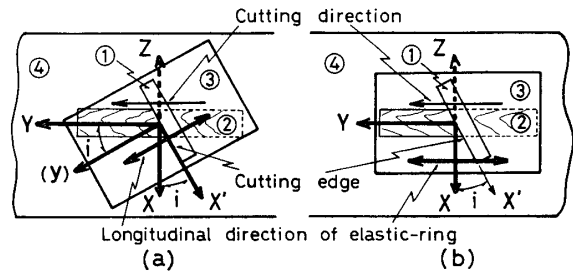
Methods for setting the inclination angle (i) to a tool fixed on the elastic-ring dynamometer.
